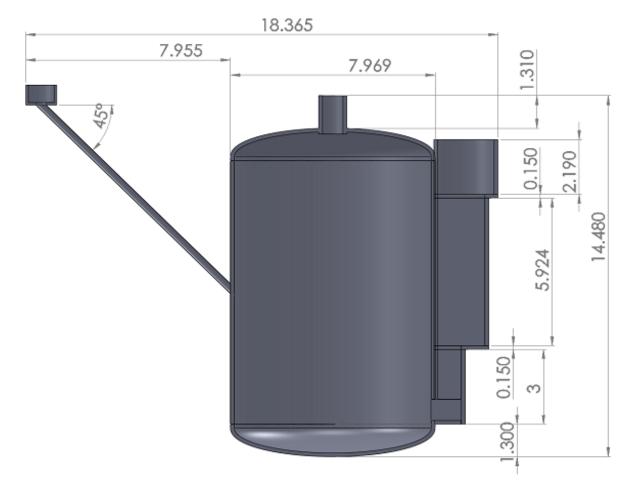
Complete drawing of cylindrical fixed dome digester.
